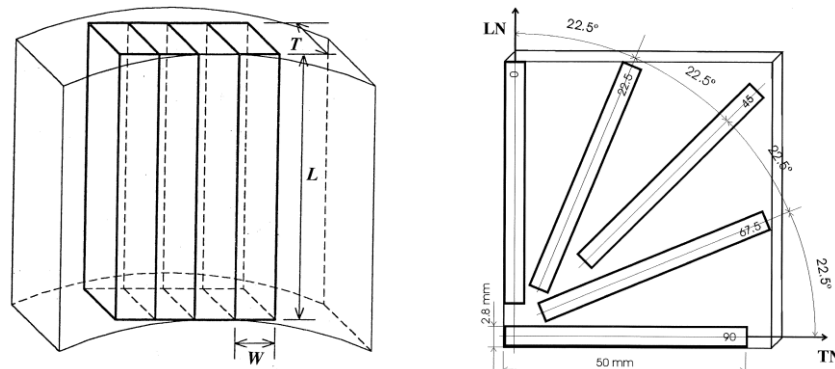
Samples machined from a piece of tube (left) or from a flattened piece of tube (right).
